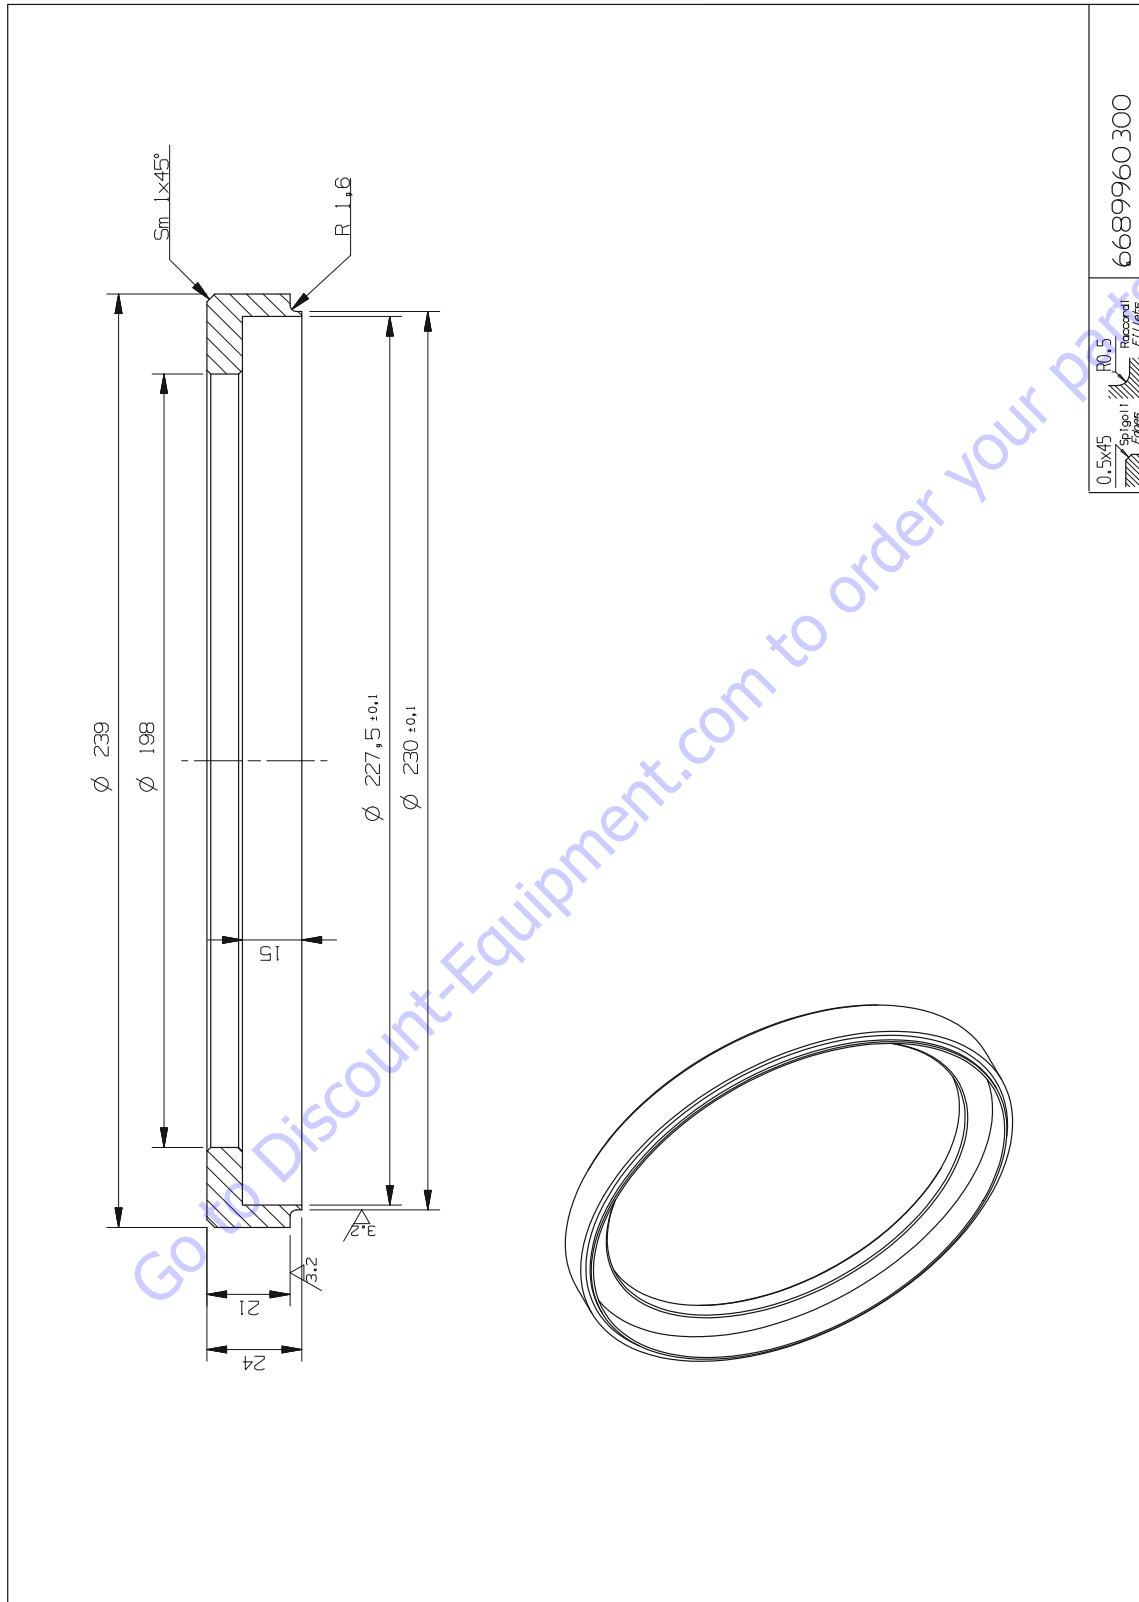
Drive Hub Special Tools - Sheet 2 of 4
